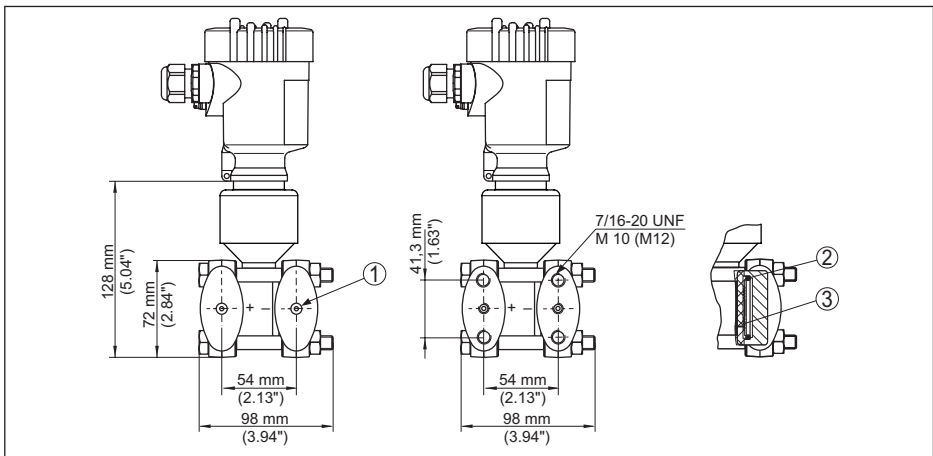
left: Process fitting VEGADIF 65 prepared for chemical seal assembly. right: Position of the copper ring seal
